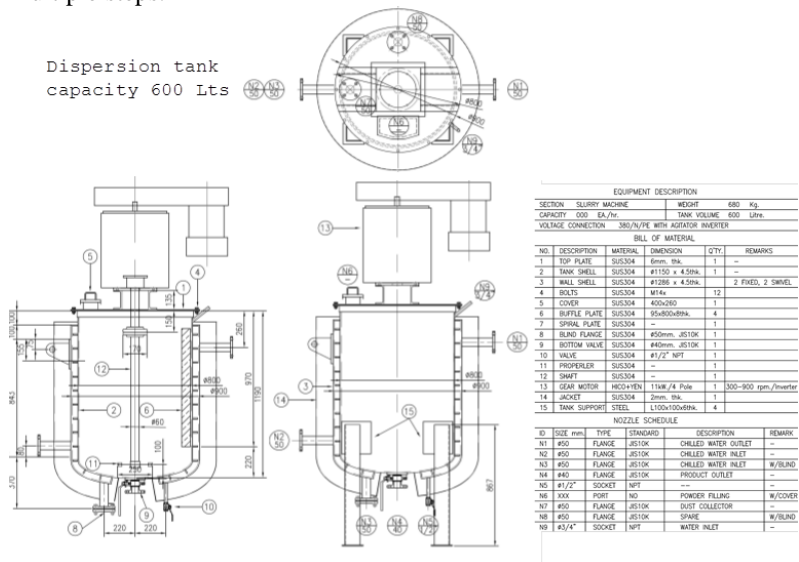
Technical drawing of 600L dispersion tank with equipment description and nozzle schedule
